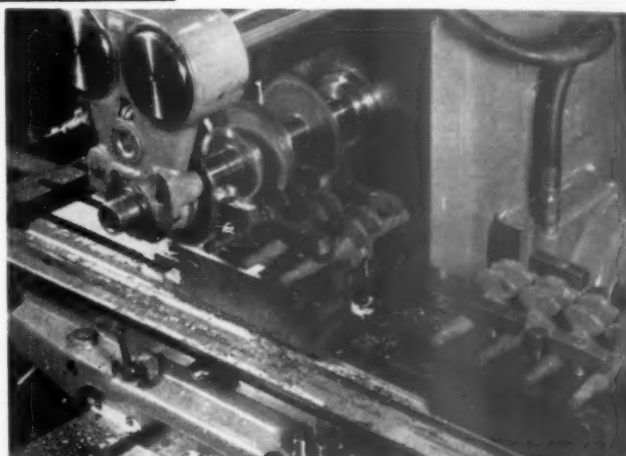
Milling an aluminum forked rod on chucking table. Cutting speed 2200 fpm, feed 90 ipm. The jaws can easily be relocated for holding other workpieces.
